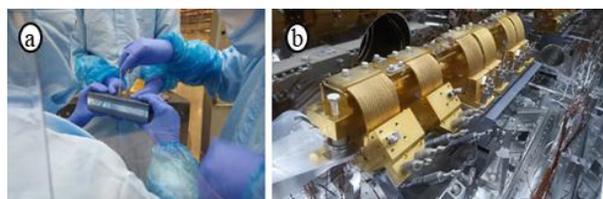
(a) CAT M1 flexible copper braid being fixed to the mirror and (b) the CAR M1 assembly installed inside the UHV chamber.
